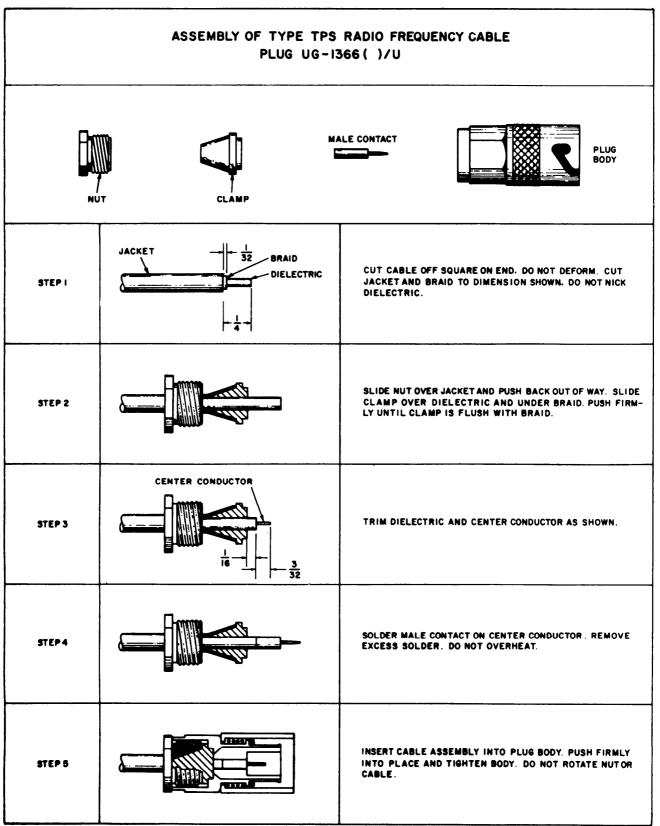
Assembly instructions for type TPS RF cable connectors.
